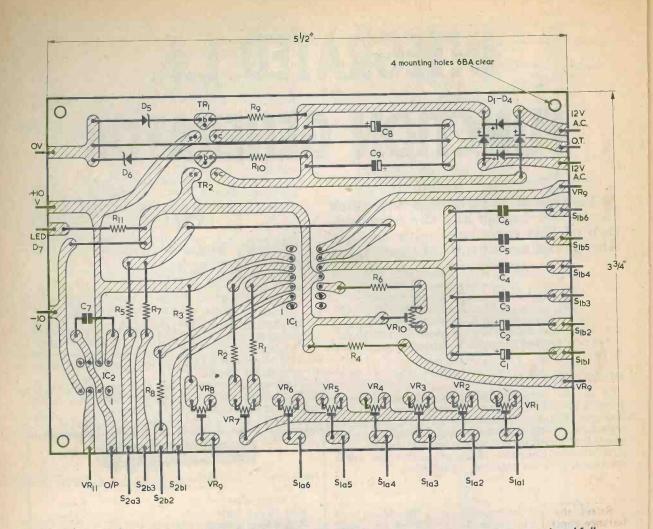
The printed circuit board for the generator, viewed from the copper side. This is reproduced fullsize and may be traced
